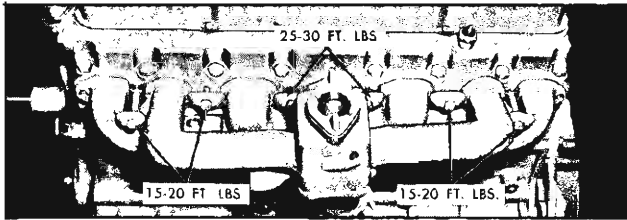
Intake and Exhaust Manifold Tightening Sequence
